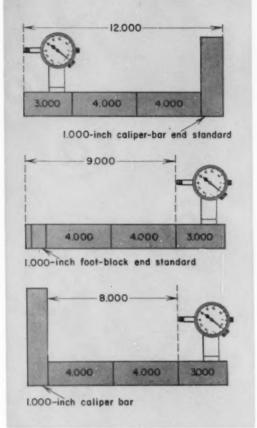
Three setups using indicating end standard. Twelve-inch external indicating gage (top), nine-inch internal indicating gage (center) and eight-inch indicating snap gage (bottom).
